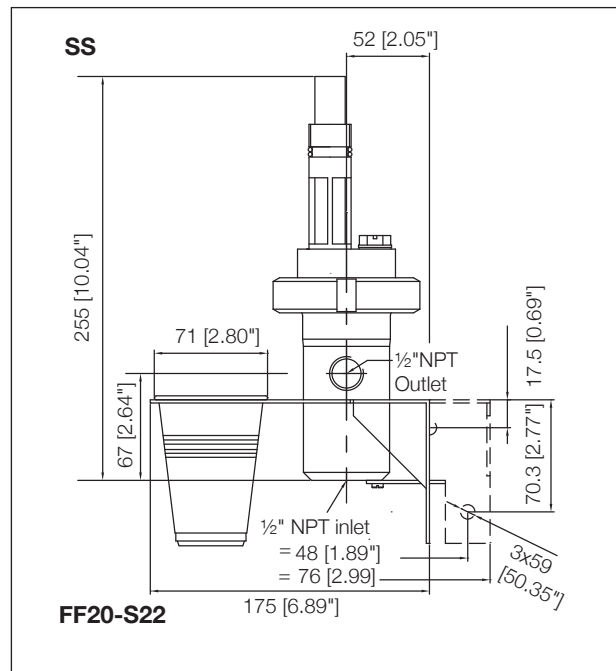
Installation example FU20-FTS in FF20-flow fitting SS
